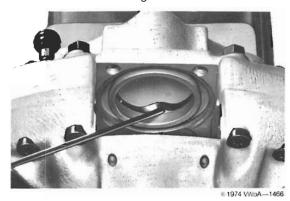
Piston seal being removed from the groove in the cylinder bore.
